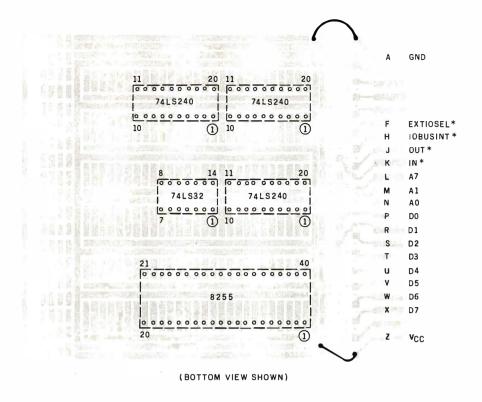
The GPIO is built on a standard prototype board using wire-wrap IC sockets.
